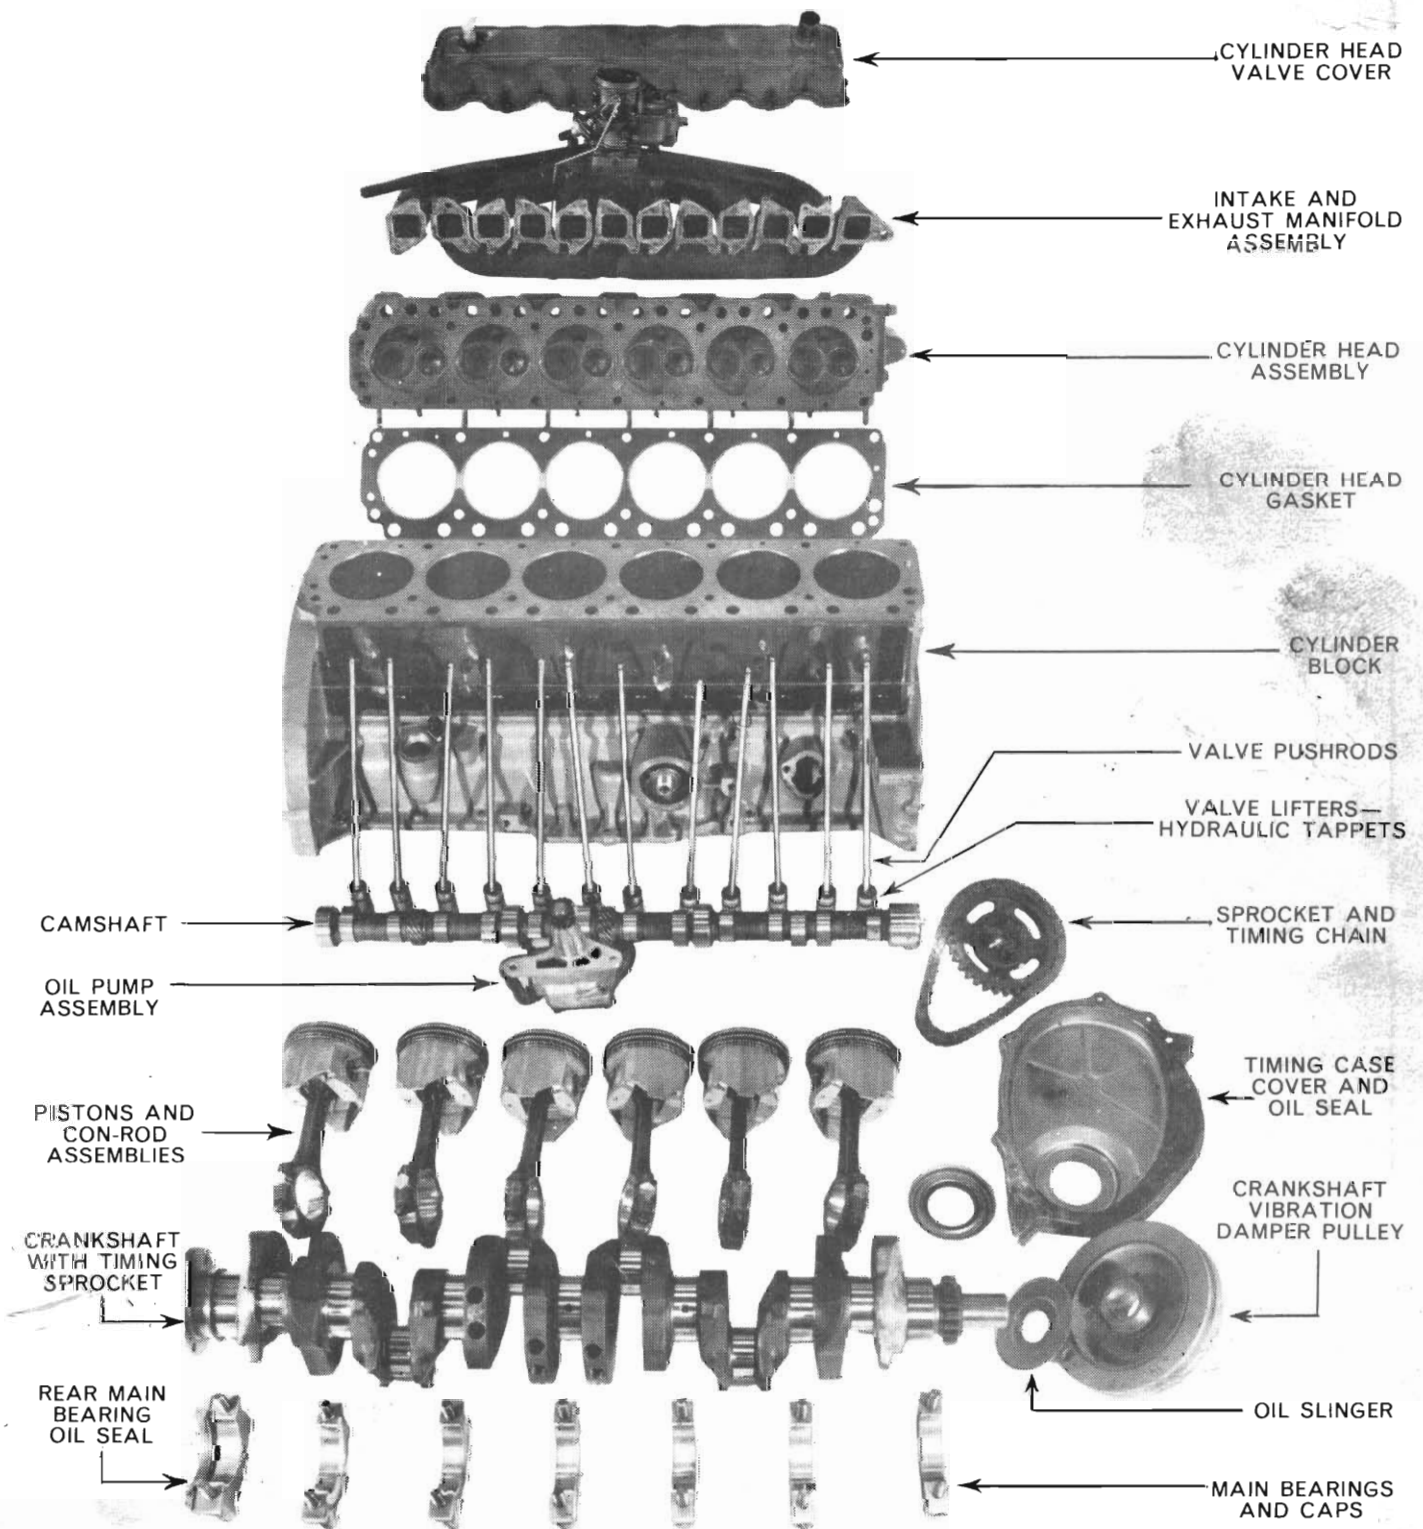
The Hemi 6 cylinder engine components (disassembled view)
